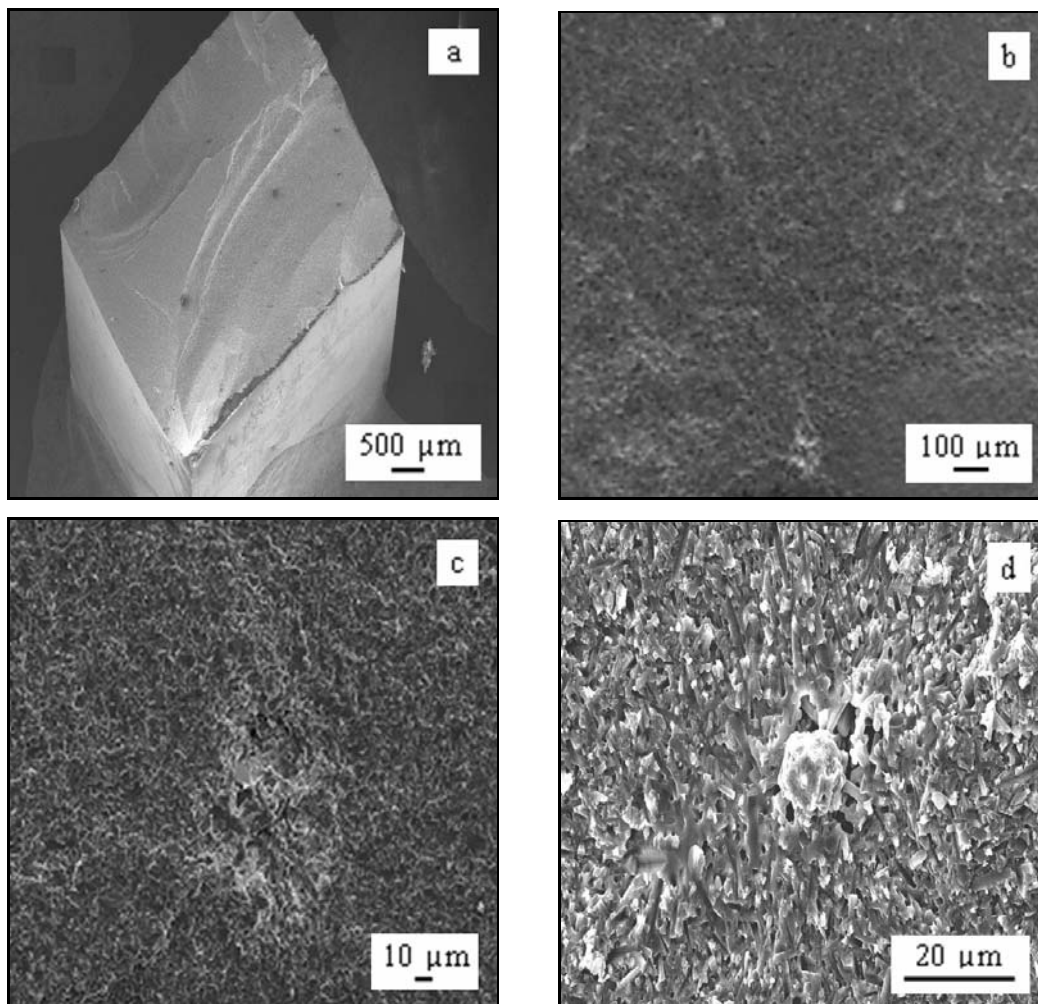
Characteristic fracture surfaces of the investigated materials. Macrofractography of the specimens ( $Si_3N_4$  (SN II)) tested in contact mode between two cylinders (a). Fracture origin in the specimen  $SiC$  tested in bending mode (b). Details of the fracture origins in the specimens  $SiC$  (c) and  $Si_3N_4$  (SN I) (d) tested in bending mode.
